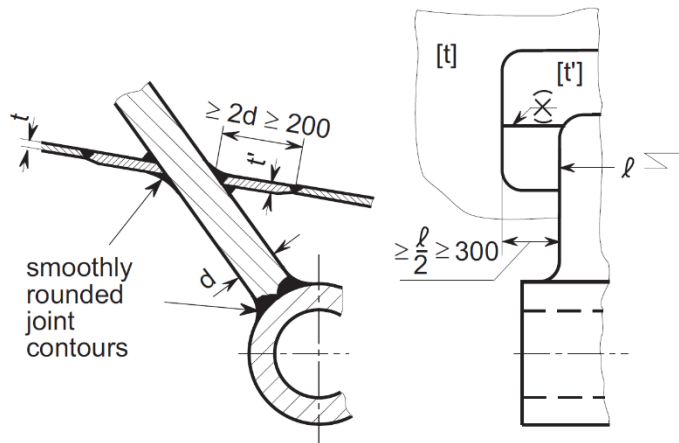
Shaft bracket with integrally cast welding flanges
